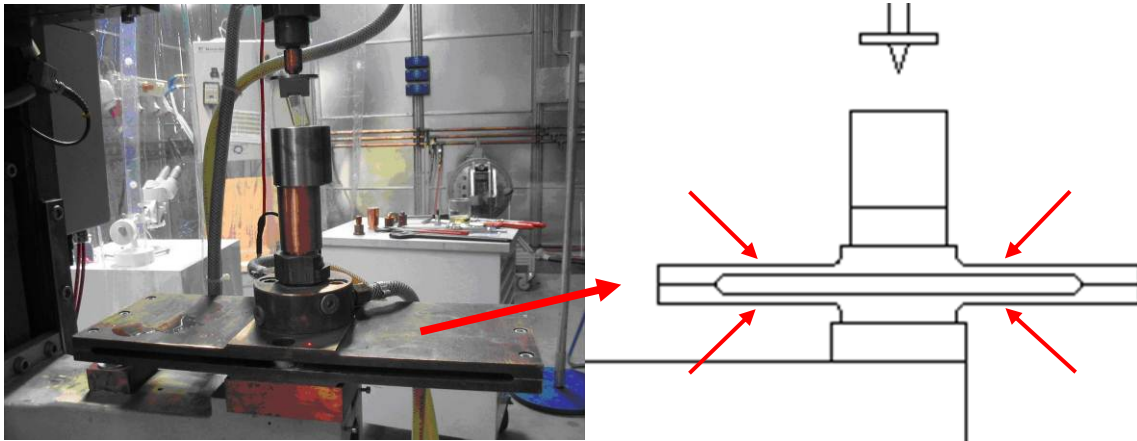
Copper follow-up spring mounted on lower welding head
